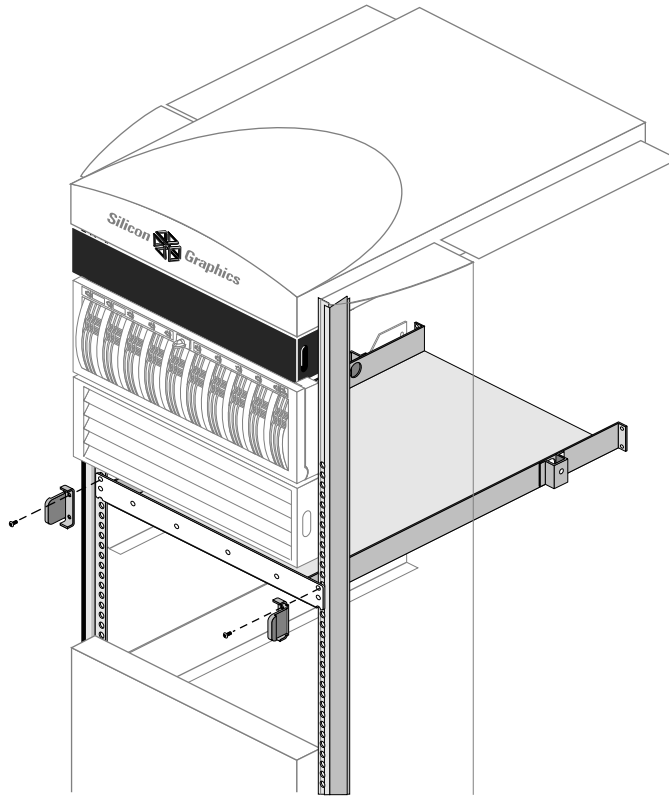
Attaching Mounting Bracket to Spring Clip on Front Rail
